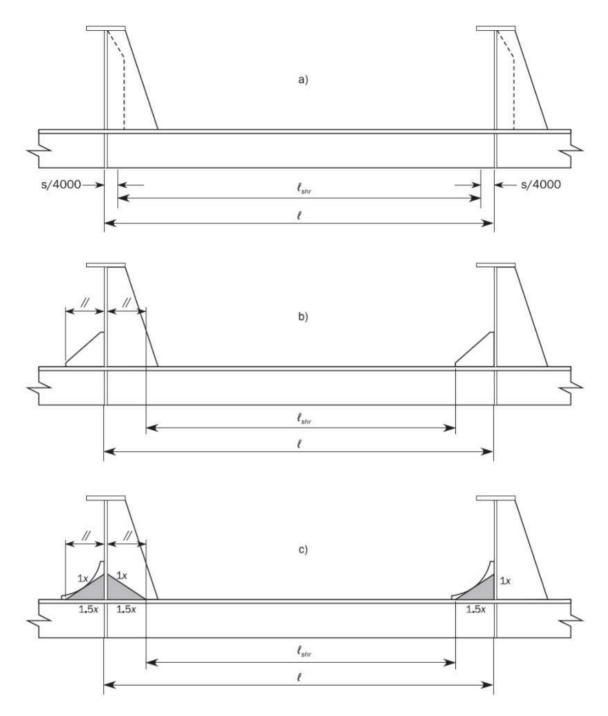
Effective shear span of stiffeners supported by web stiffeners (single skin construction)
